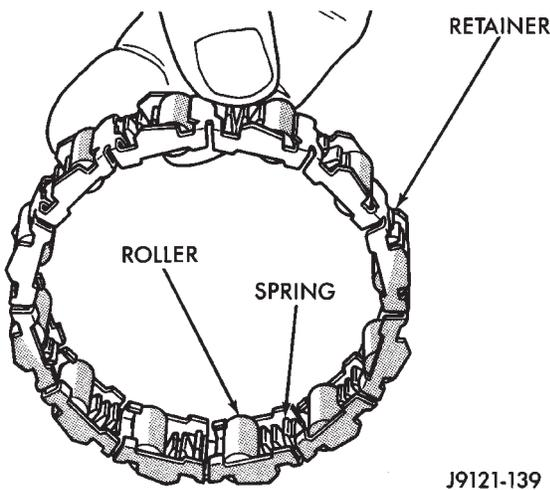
Overrunning Clutch Rollers, Springs, Retainer
